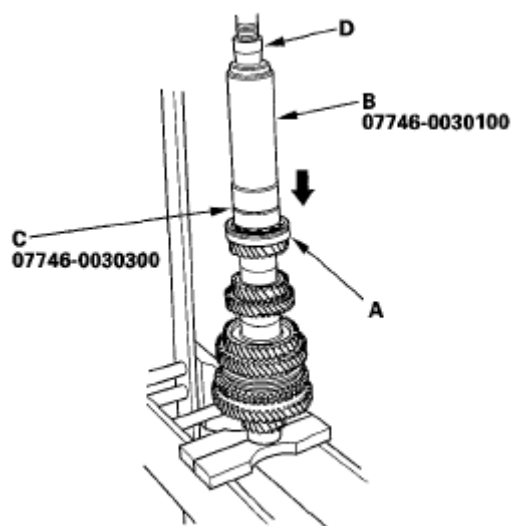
Identifying Ball Bearing, I.D. Driver, I.D. Attachment And Press
